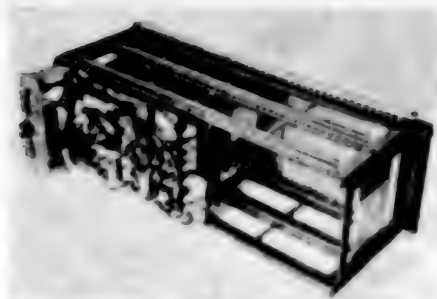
Subassembly Rack K 0118 (K 0117) for Housing
